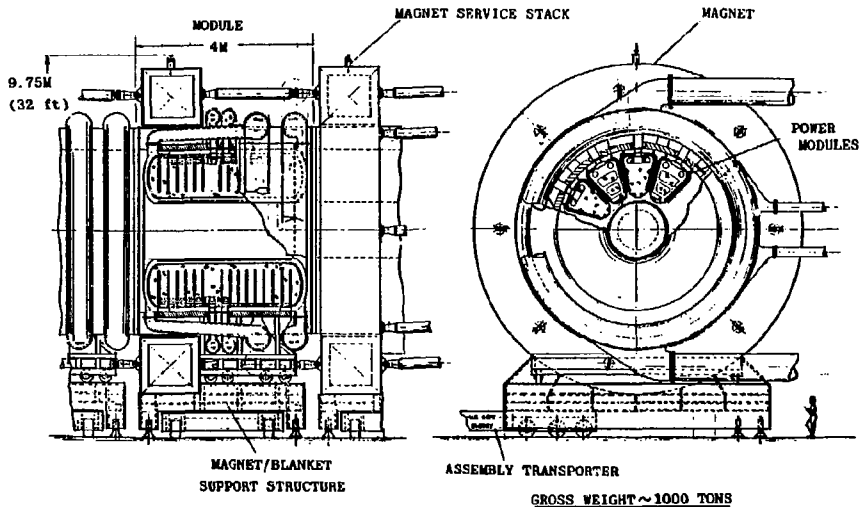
MARS magnet and module assembly showing the blanket assembly transporter.
